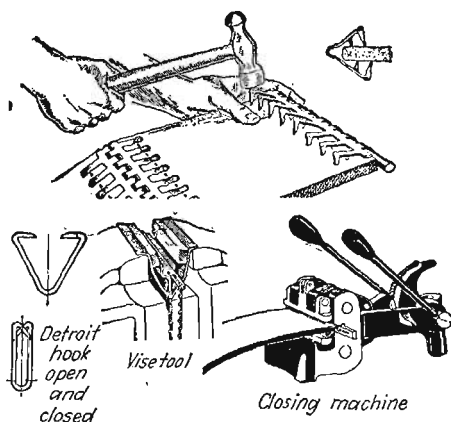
Methods of closing metal belt laces: Alligator above, Clipper below.
